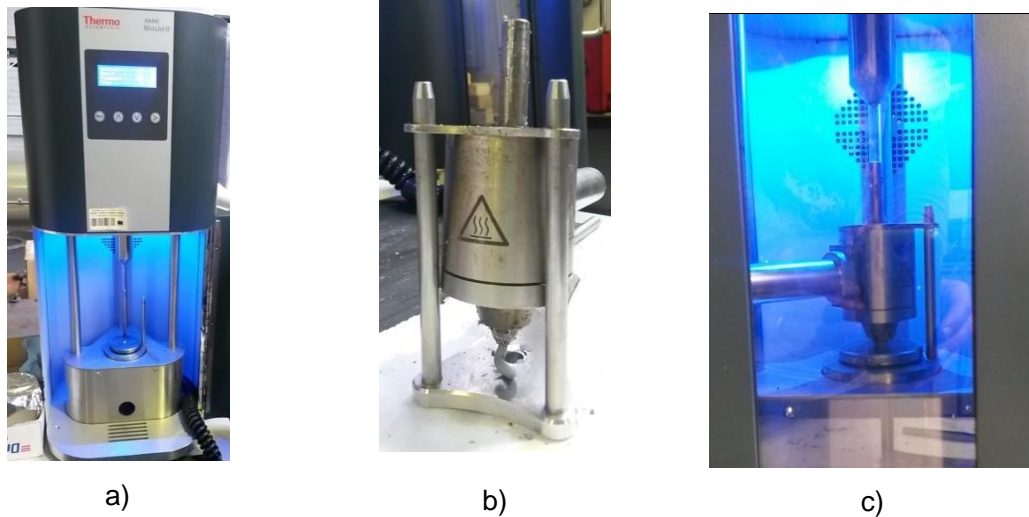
MiniJet Pro Piston Injection Moulding System a) machine, b) cylinder and c) cylinder inside machine
